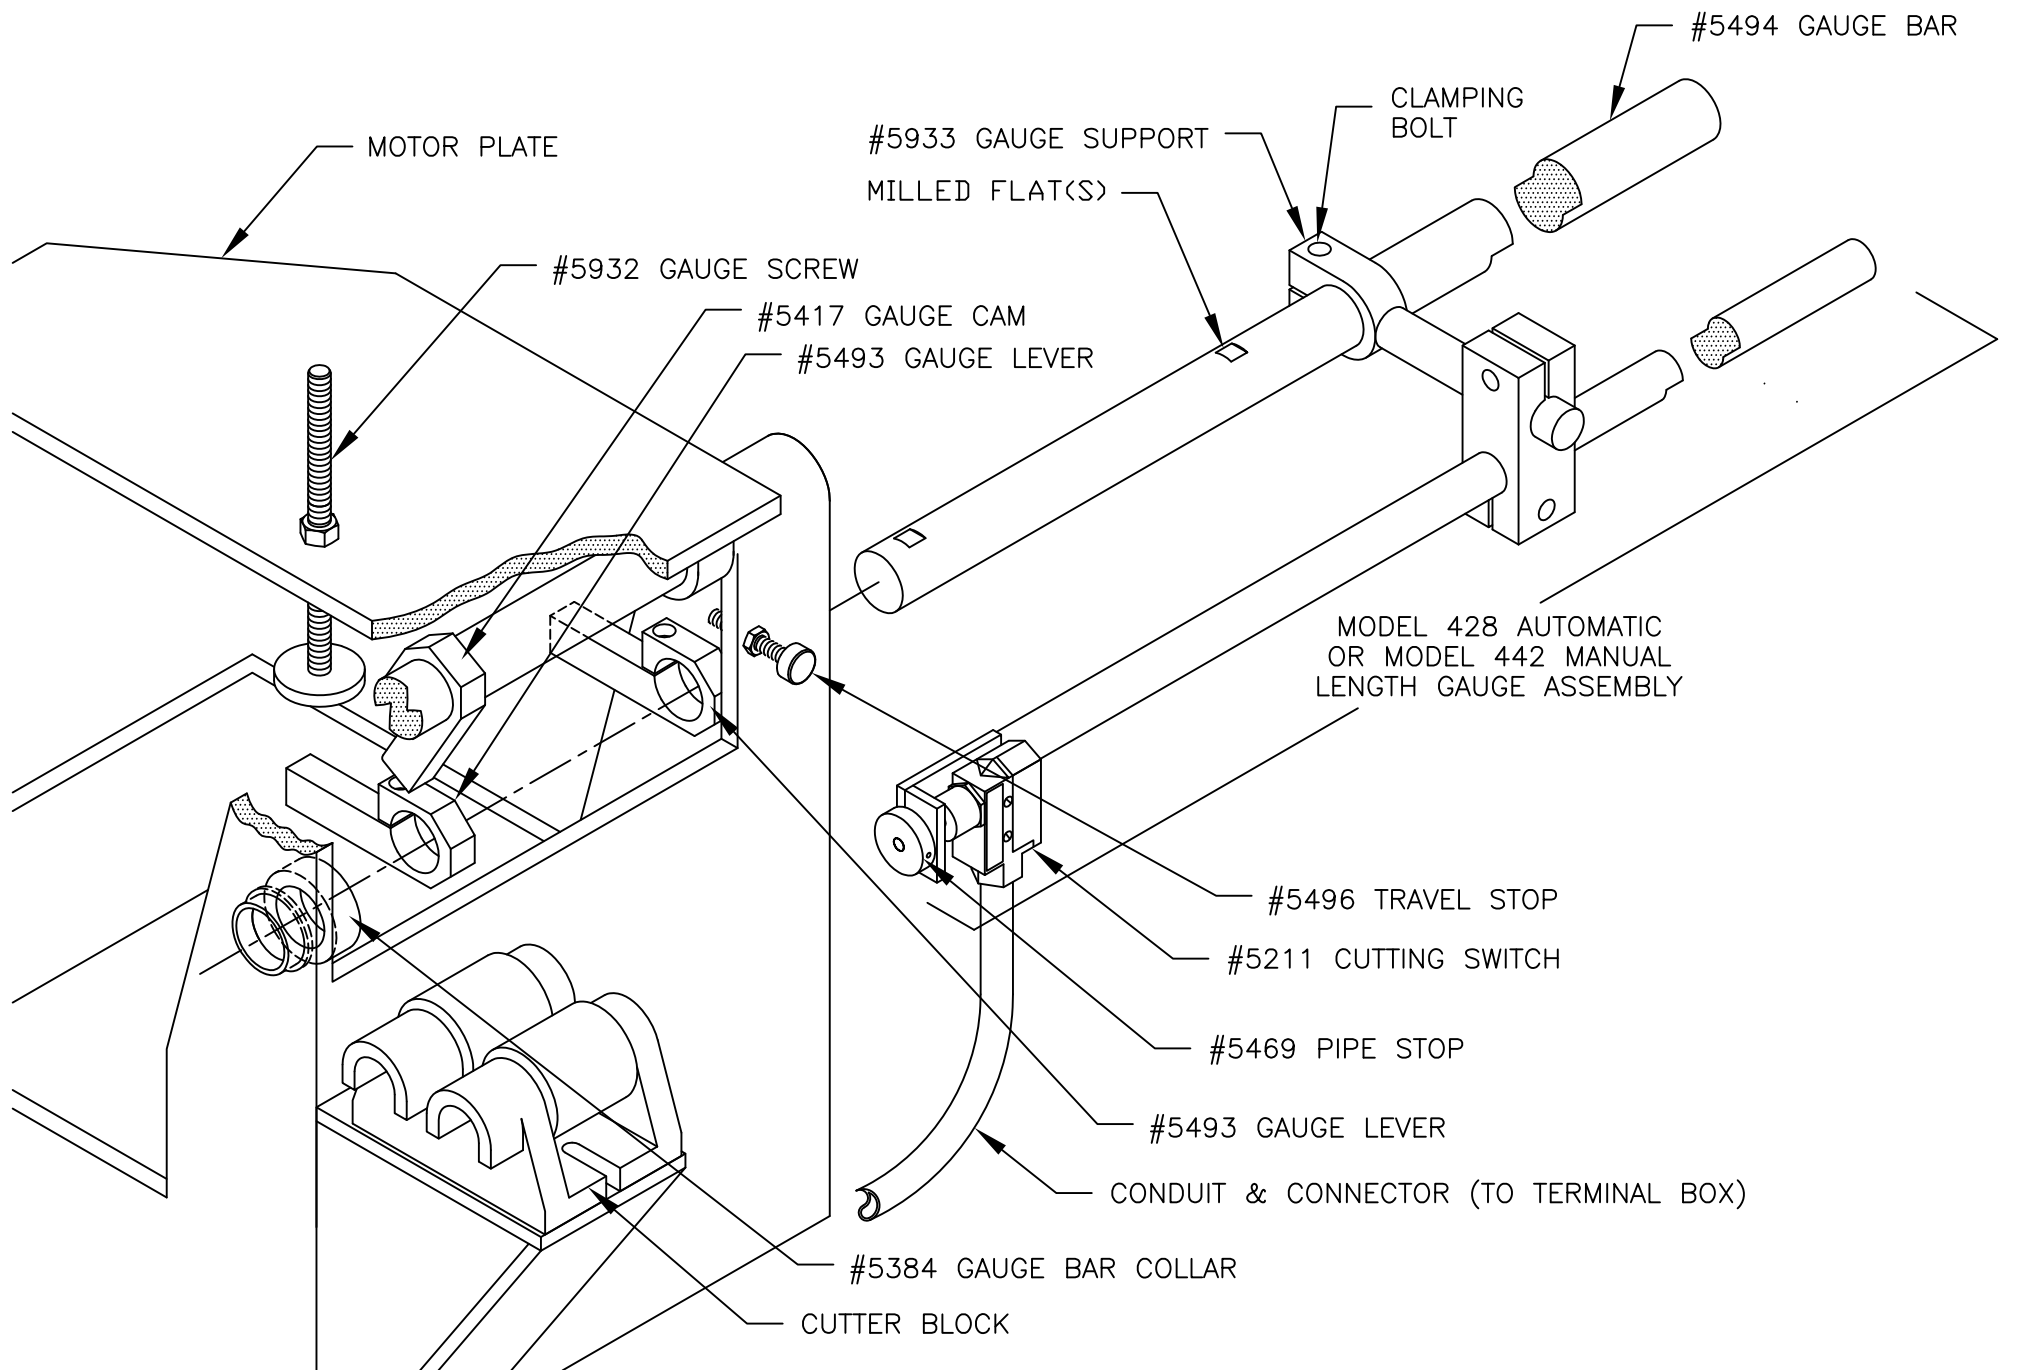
ASSEMBLY OF LENGTH GAUGE TO CUT-OFF MACHINE
